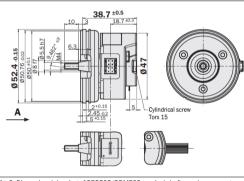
Dimensional drawing of SRS50S/SRM50S, conical shaft, resolver support
